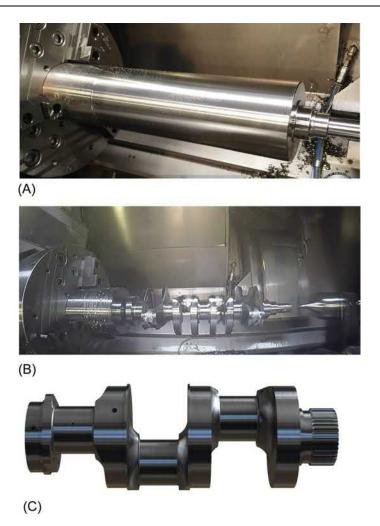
Example of a crankshaft machined from a billet. Top: prior to machining; Center: billet during the machining process; and Bottom: final product. Courtesy of Ingersoll Rand Company.
